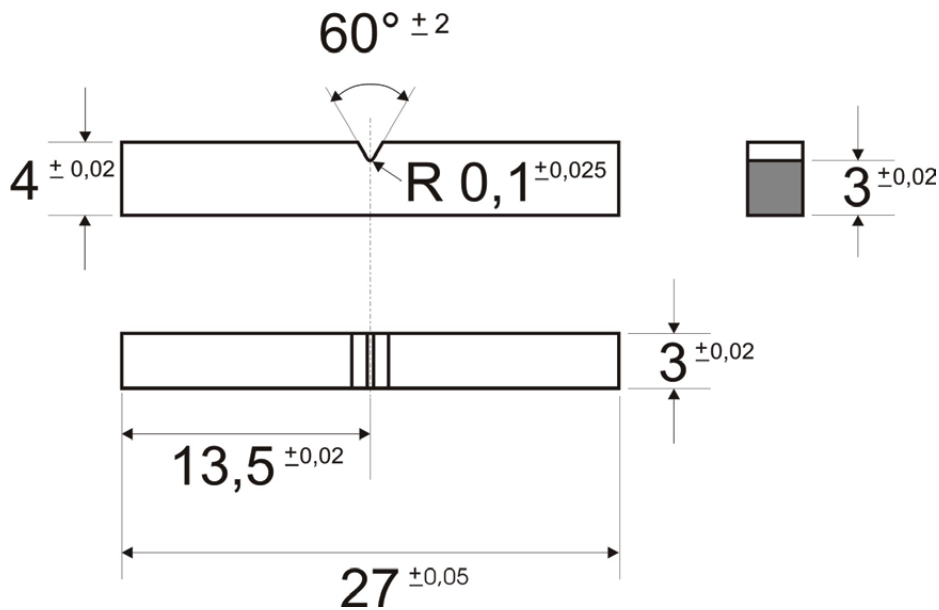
KLST impact specimen (all dimensions in mm); Detail the specimen notch.
